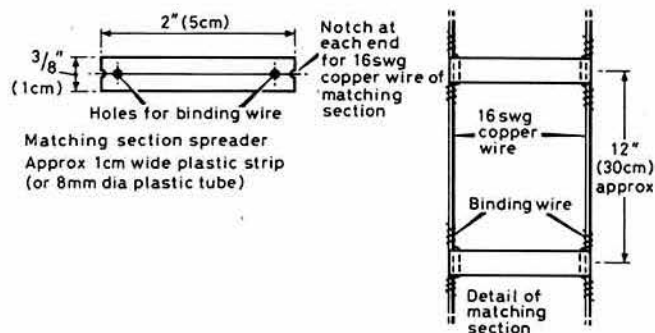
Constructional details of the matching section. Also suitable for open-wire feeder construction
